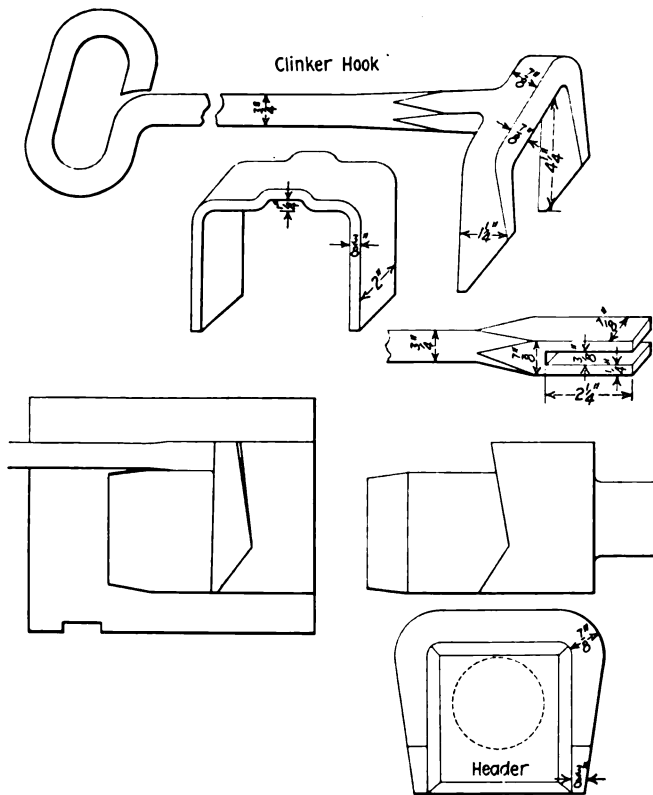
A die for forming clinker hooks on a four-inch forging machine
